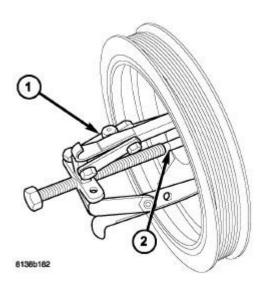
Removing Crankshaft Damper Courtesy of CHRYSLER LLC
